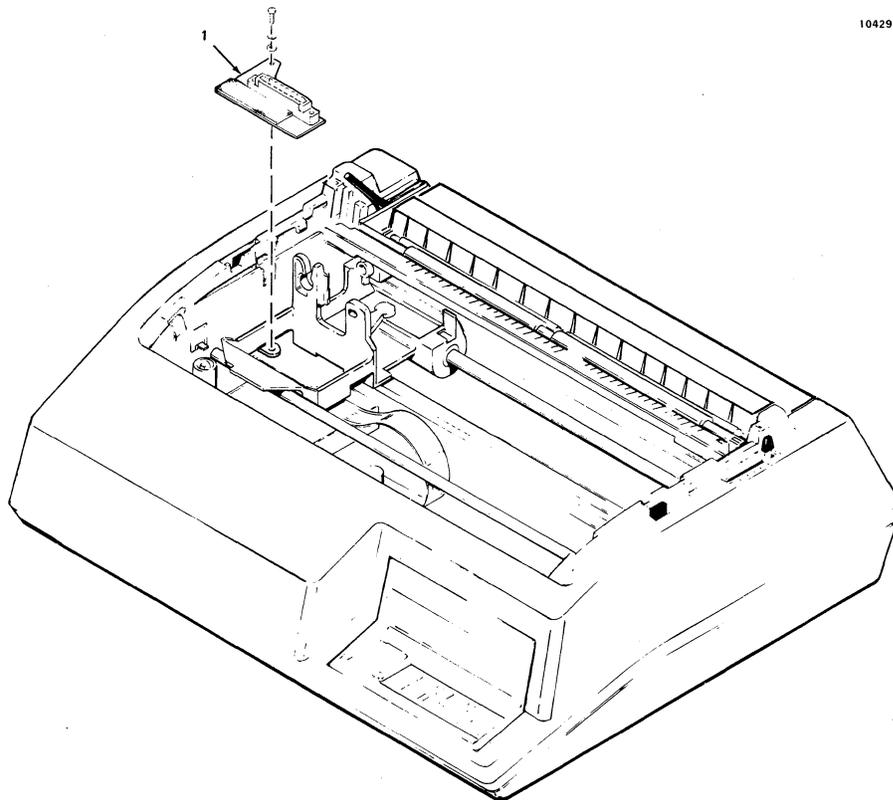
REMOVAL/REPLACEMENT, HEAD ADAPTER PCB
